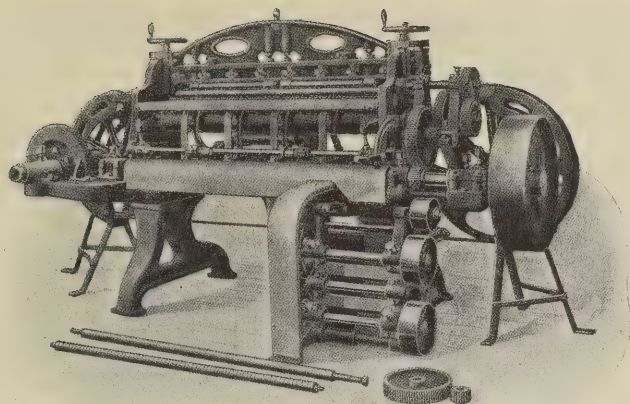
Splitting machine for limed or tanned stock—the Turner Tanning Machinery Company
